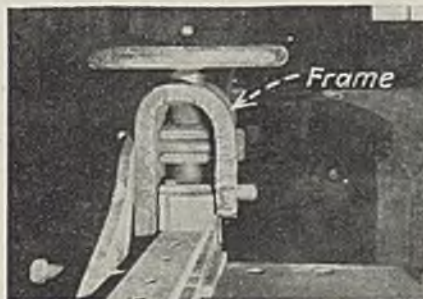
Showing clamping screw with hand-wheel and clamping block in place in the frame.
